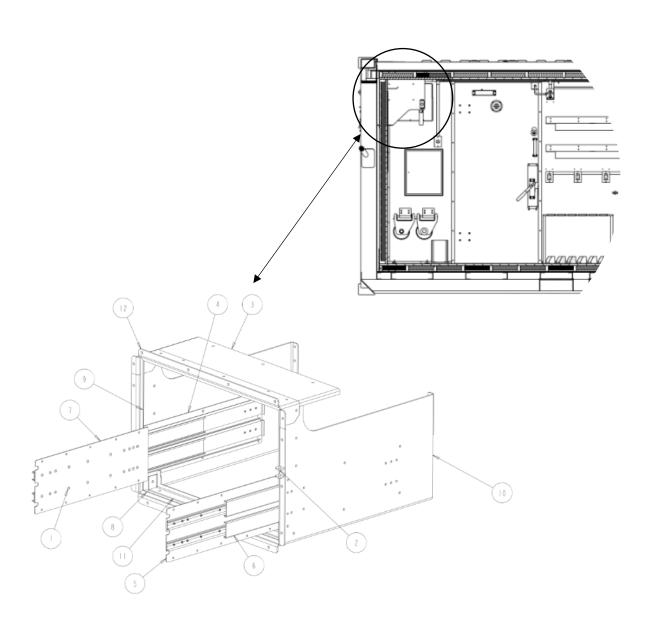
EJOC HVAC AND COMPLETE HOUSING ASSEMBLY
